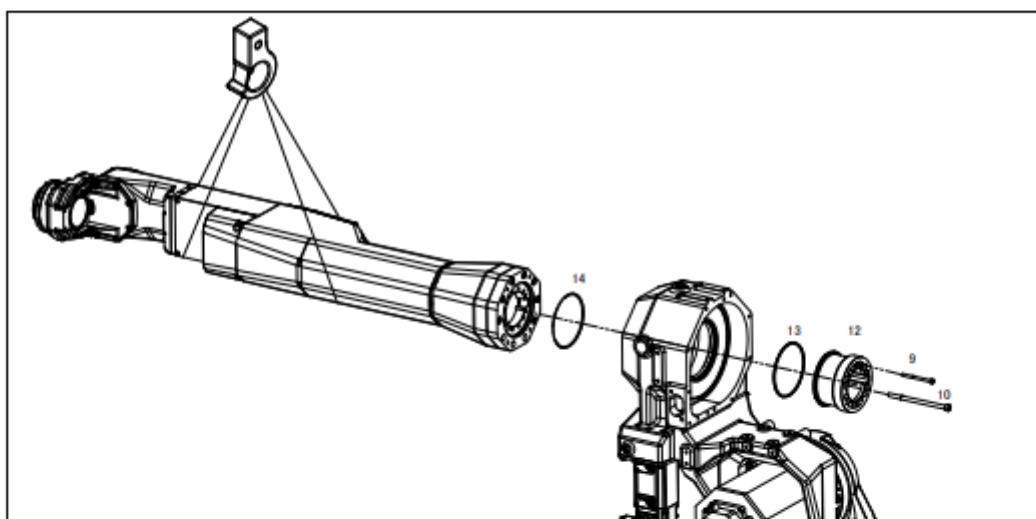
(d) Replacing the J4-axis gearbox (ARC Mate 120iC/10L/12L, M-20iA/10L/12L)
